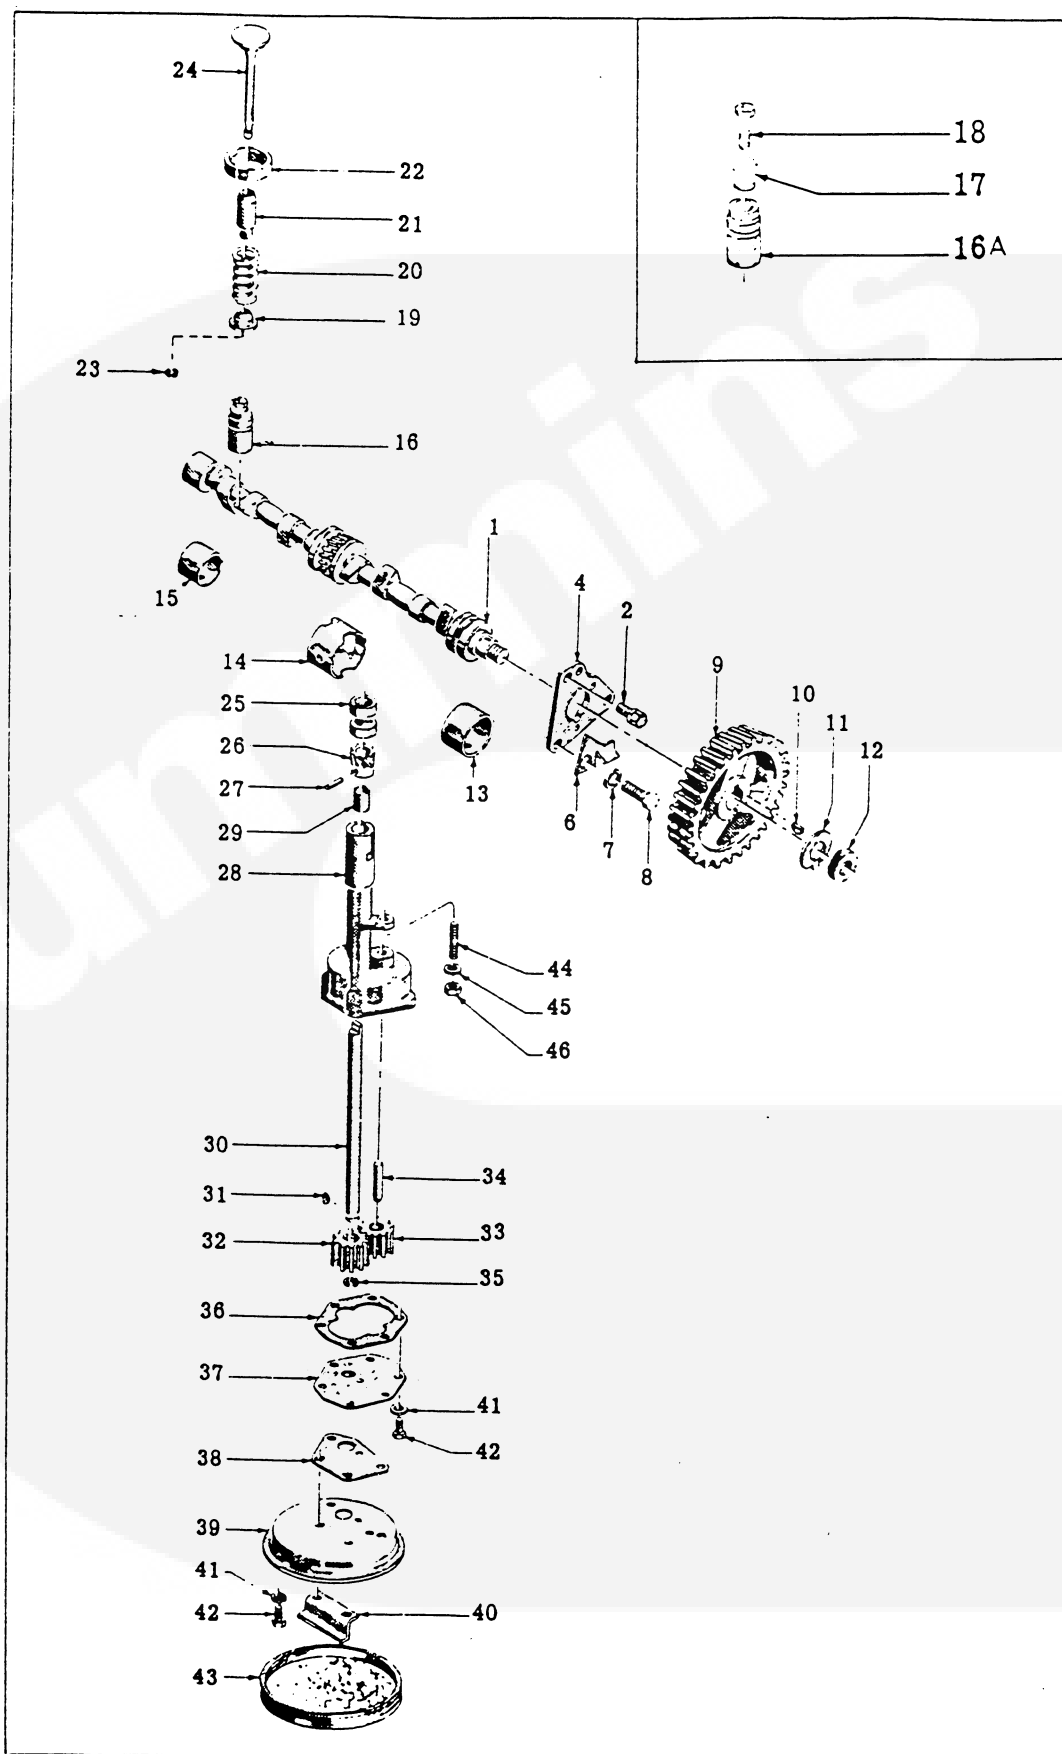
CAMSHAFT & OIL PUMP PARTS GROUP
